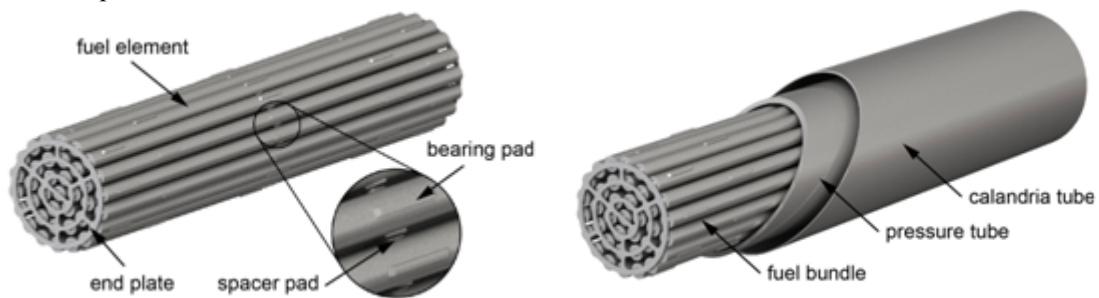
a) Isometric view of a 37 element CANDU fuel bundle, and b) the configuration of a CANDU fuel channel including the fuel bundle, pressure tube and calandria tube [4].
